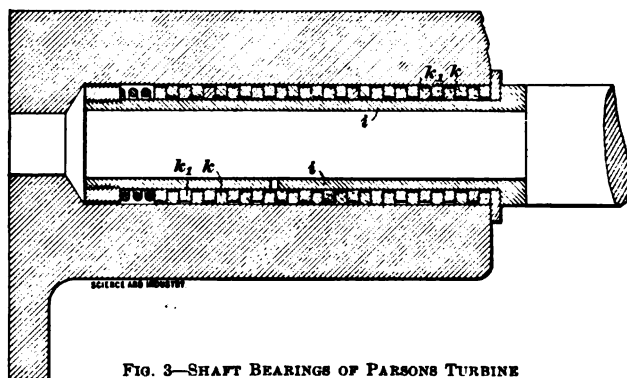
SHAFT BEARINGS OF PARSONS TURBINE
